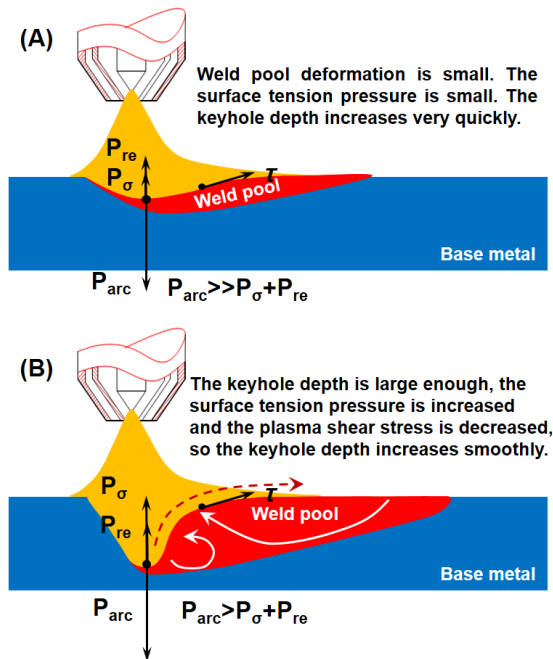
The pressure balance of the blind keyhole bottom in the vertical direction: (A) The weld pool deformation is small; (B) A deep keyhole is formed
